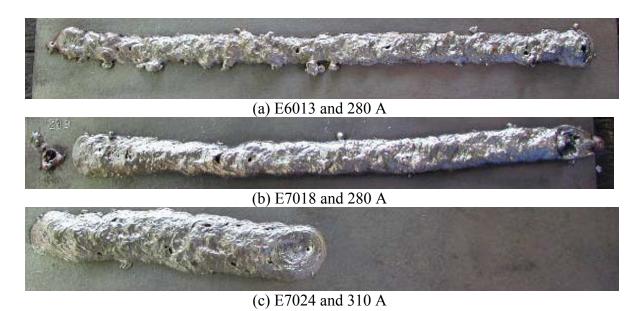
Pictures of the bead-on-plate wet welds deposited with the three electrode types with electrode negative on API 5L Gr. B steel plates at 100m.
